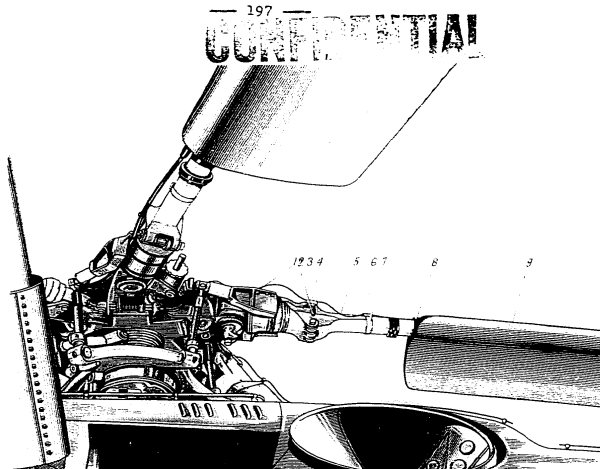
BLADE-TO-MAIN ROTOR HUB ATTACHMENT
